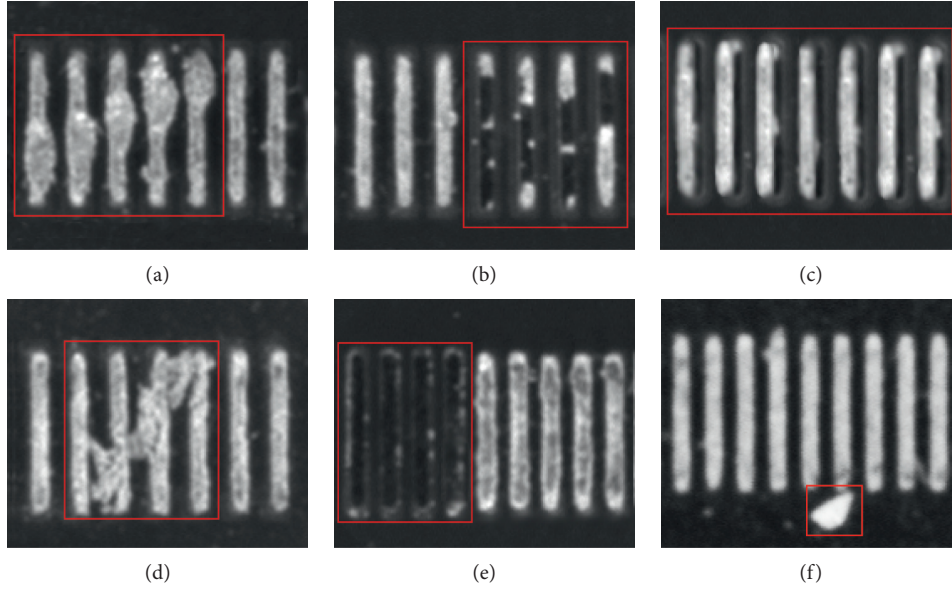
Six types of defects: (a) Excessive Solder, (b) Insufficient Solder, (c) Solder Offset, (d) Solder Bridge, (e) Missing Printing, and (f) Spattering Solder.
